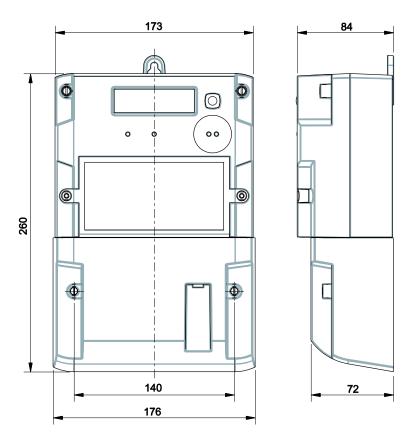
Meter dimensions (version with extended terminal cover)
